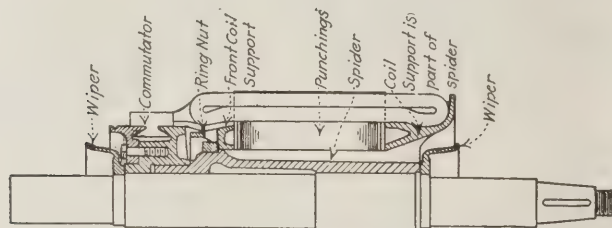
IRON BUILT ON SHAFT NUT BETWEEN COMMUTATOR AND CORE
